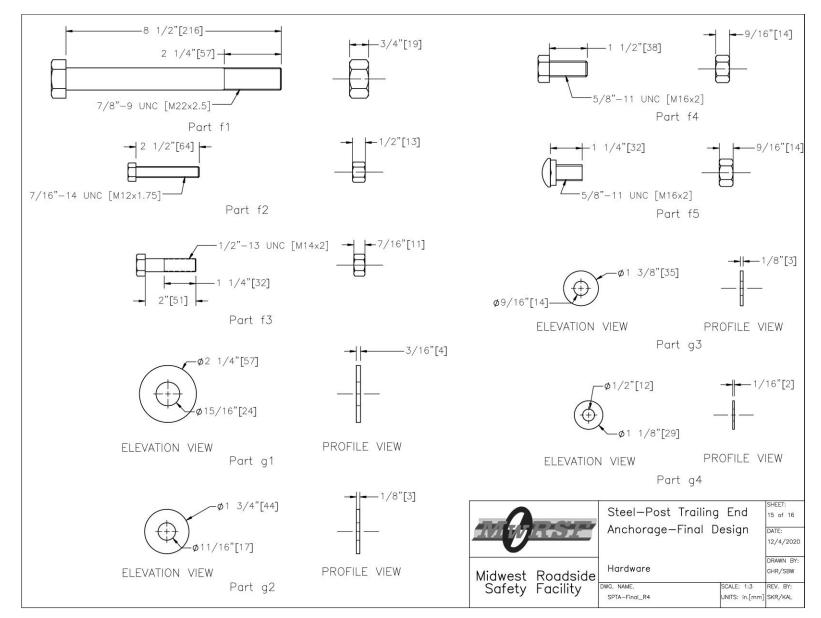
Steel-Post Trailing End Anchorage, Hardware
